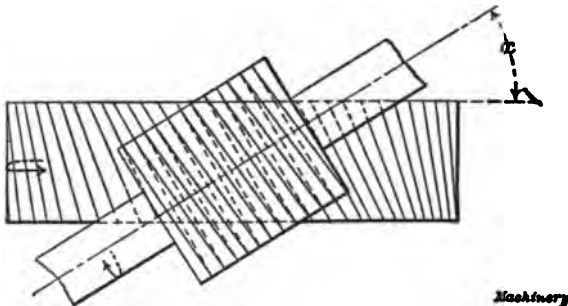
Cutting a Left-hand Spiral Gear with a Right-hand Hob
